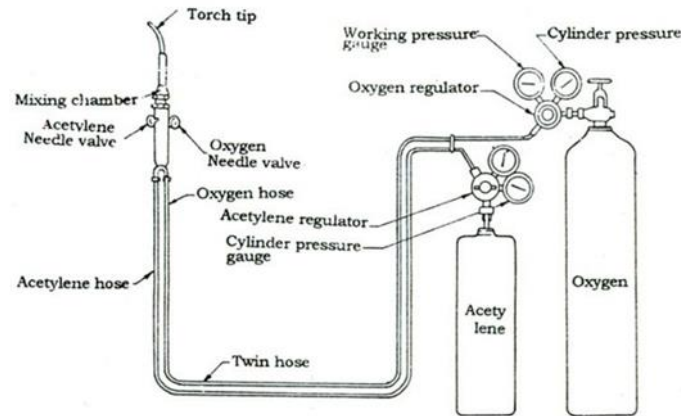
Schematic of Oxy-Acetylene Welding (OAW) Process [22].
